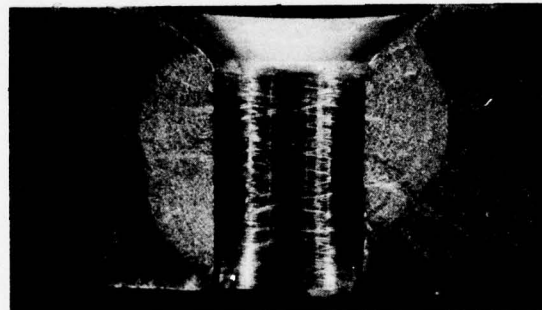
FATIGUE CRACK INITIATING AT TOOL SMEAR. PHOTO ALSO SHOWS STRONG INFLUENCE OF REAMER WITHDRAWAL SCRATCH ON SECOND INITIATION AND SUBSEQUENT CHANGE IN CRACK GROWTH PLANE. HOLE IS COLD-WORKED (SPECIMEN NO. 3-2, HOLE 1); REF FIGURE 19.
